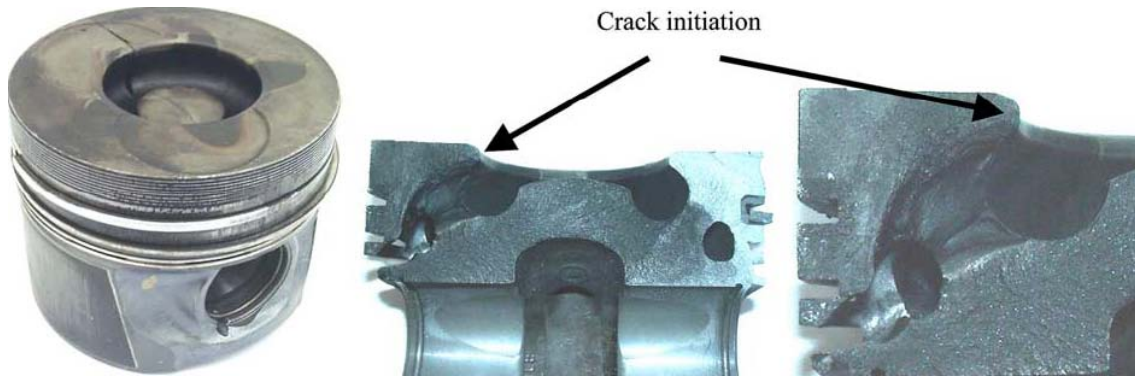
Diesel engine piston (with cooling gallery) with a crack from one side of the pin hole to the head.
